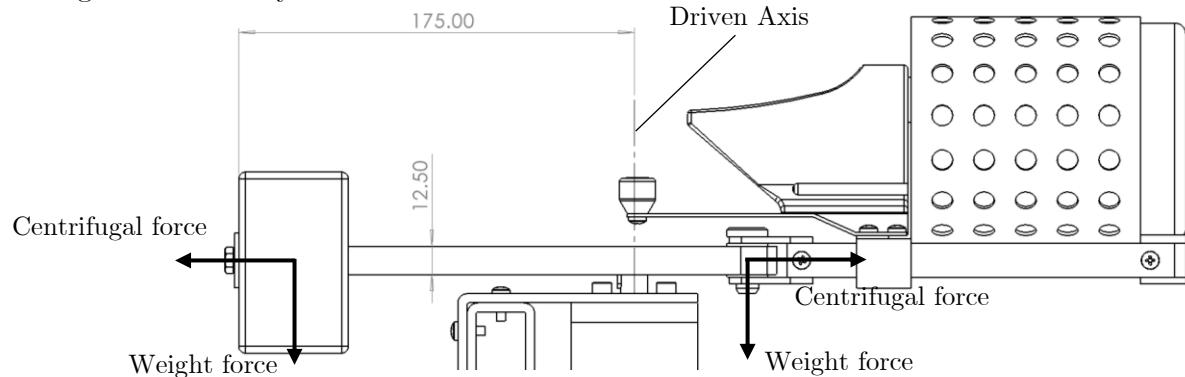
Schematic of casting arm assembly showing components and forces relevant for calculations
